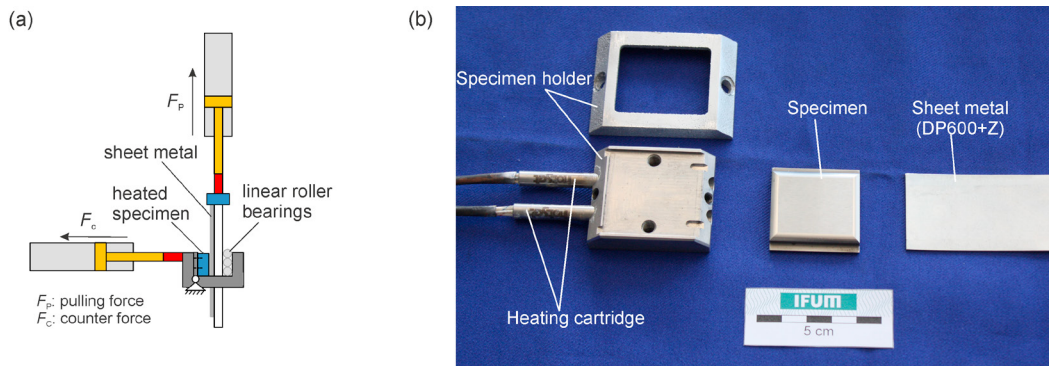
(a) Principle of plane strip drawing test; (b) specimen geometry for investigation of friction characteristics.
